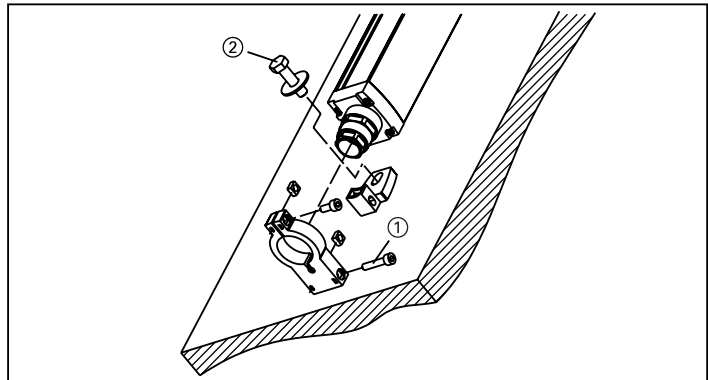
Mounting of C 2000, M 2000 and M 2000-A/P with swivel mount
